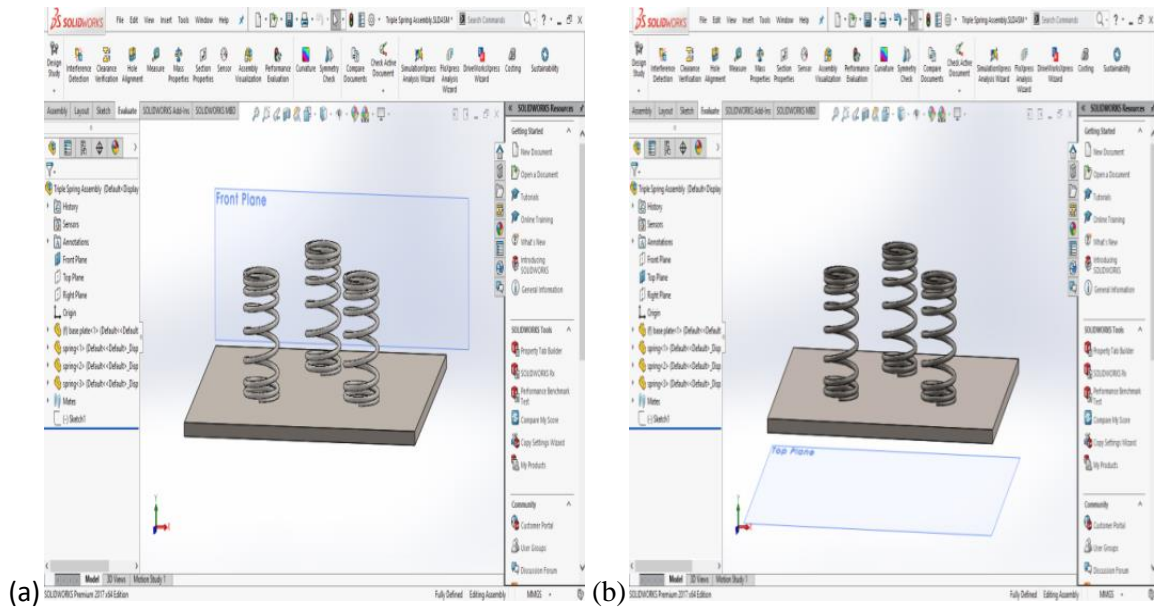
triple helical (a) spring steel springs, and (b) alloy-steel springs
